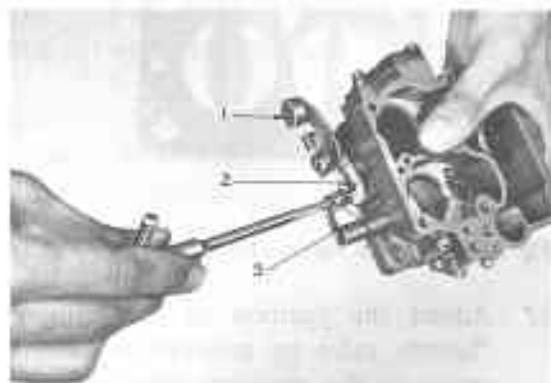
Shaft Arm &amp; Stopper Lever Assembly
